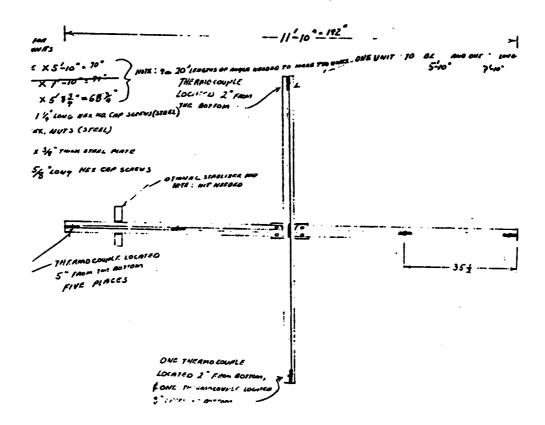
Shop drawing of thermocouple rack (for pavement slabs).
